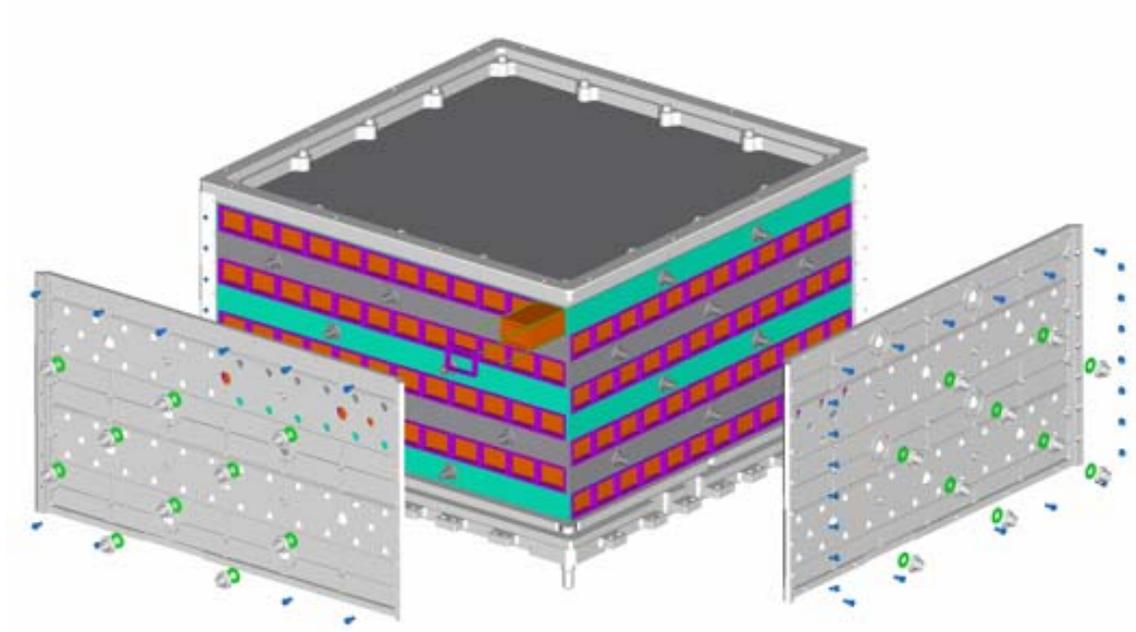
Pre-Electronics Module assembly. The PEM assembly drawing is LAT-DS-01224.
